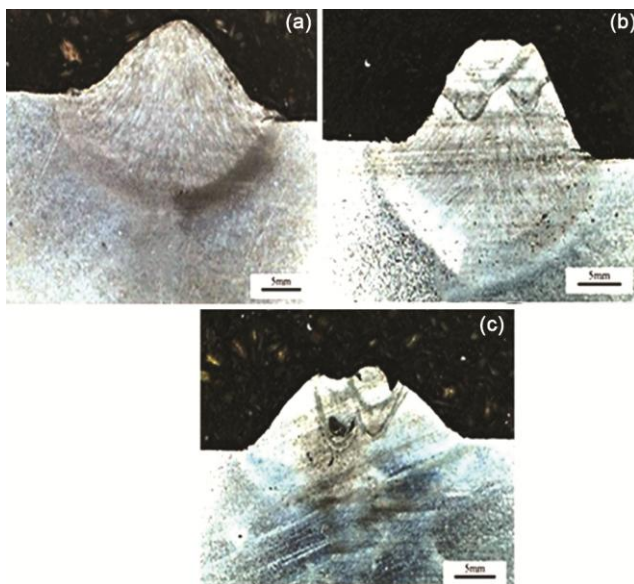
Cross sectional morphologies of (a) MIG welding and (b) Laser remelted MIG (Power :600 W) and laser remelted MIG (power: 400 W).
